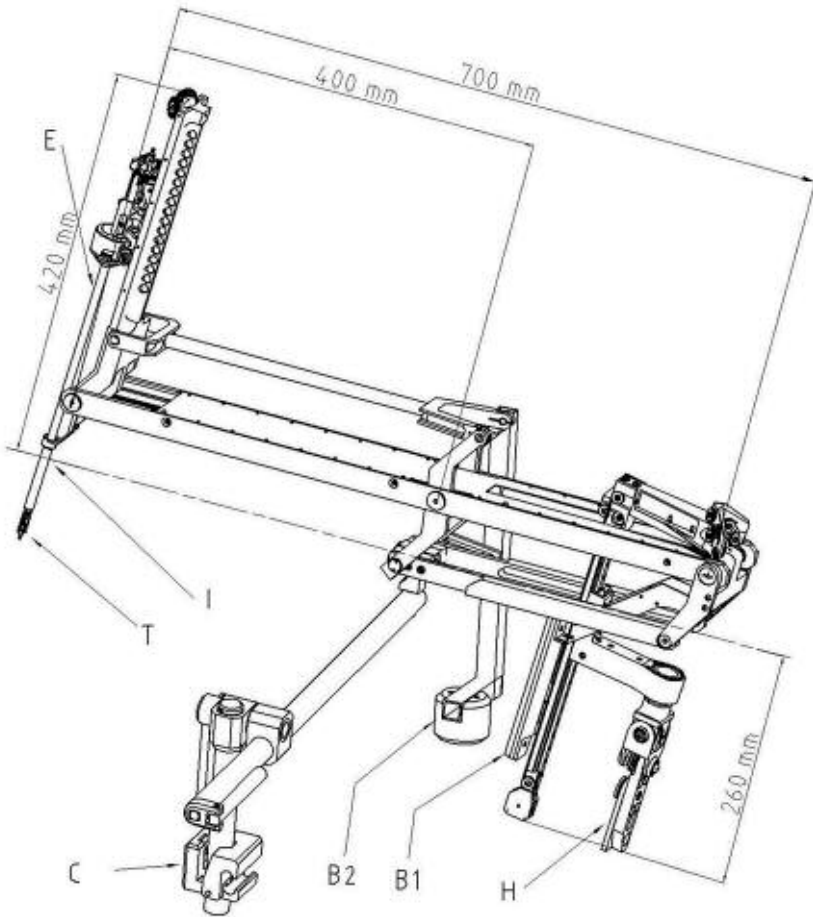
CAD drawing of the Mechanical Manipulator. The drawing shows the parallelogram mechanism with its main dimensions and the other essential part of the device: H=handle, E=endoscopic instrument, T=tip of instrument, I=incision in the patient's body where the instrument can rotate about (DOF 1,2), C=coupling to the operation table rail, B1=counterweight for balancing the translation movement (DOF 4) and B2=counterweight for balancing the rotations about the incision (DOF 1,2)
